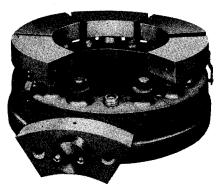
TYPICAL THRUST BEARING FOR LARGE WATER WHEEL GENERATORS (ONE SHOE REMOVED).
